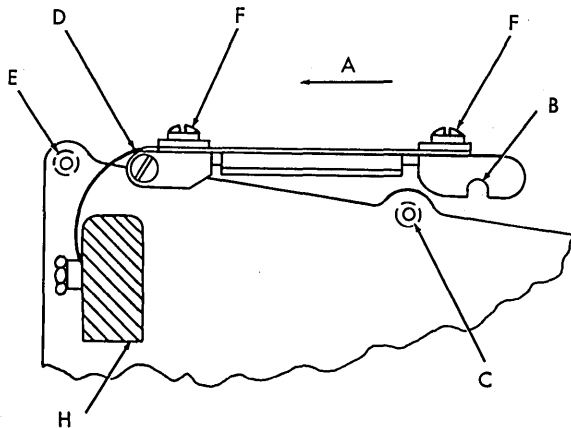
Encode Board & Diaphragm Replacement (Old Style)
